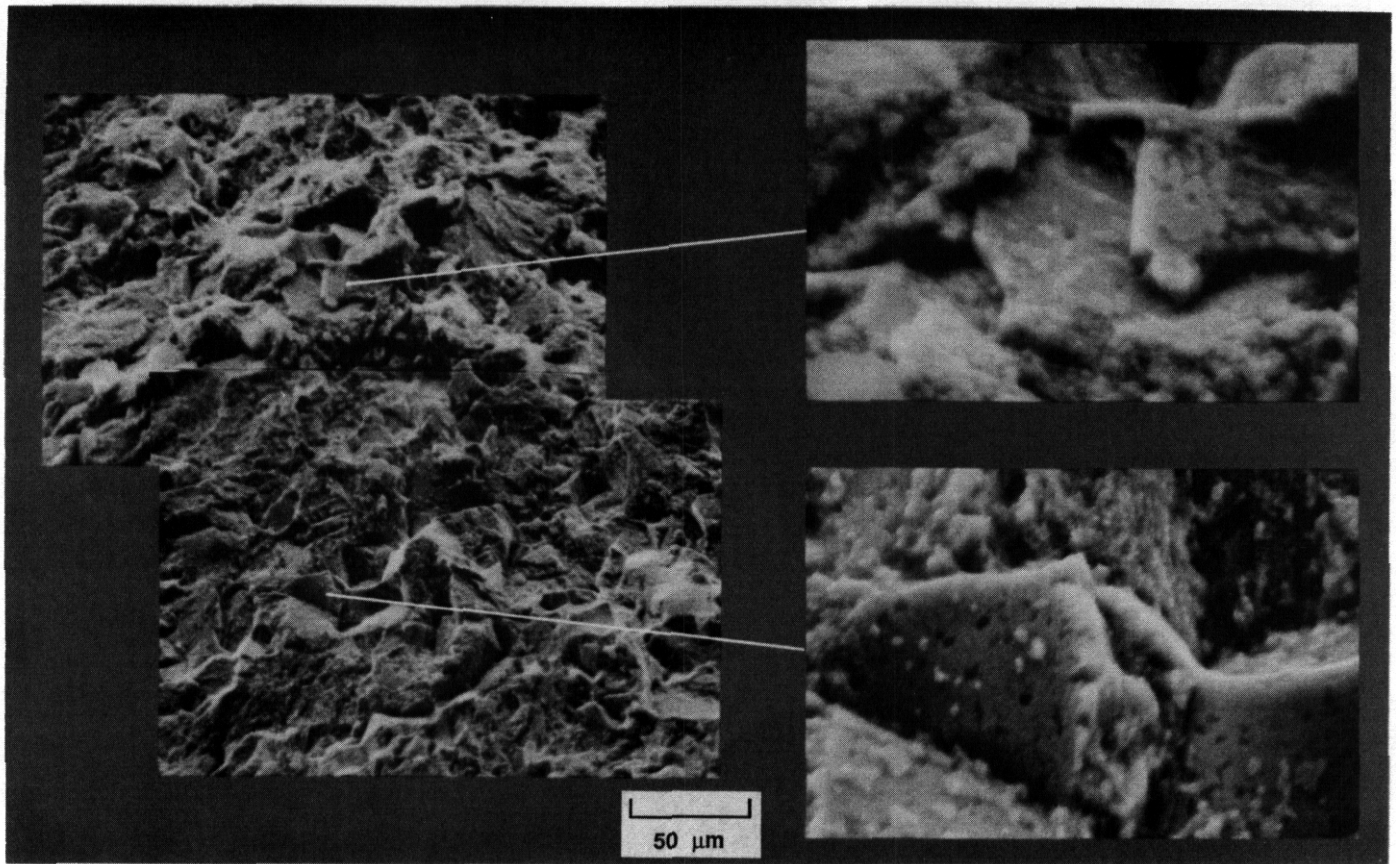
Fresh fracture surface of EA-35, showing cleavage-like failure.
